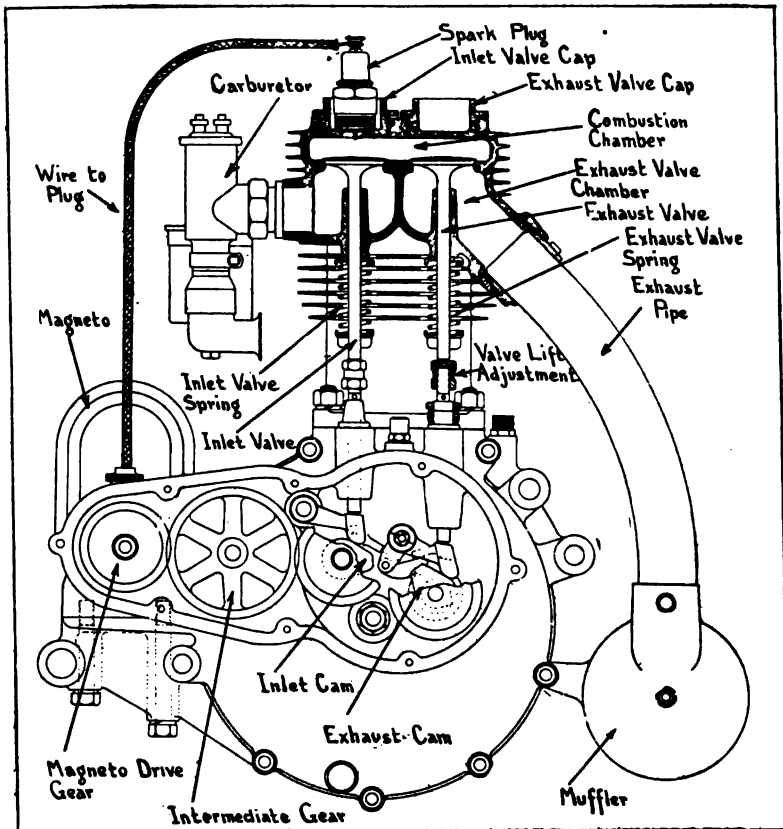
Motorcycle power plant of foreign design, showing location of carburetor, muffer, and ignition magneto.
